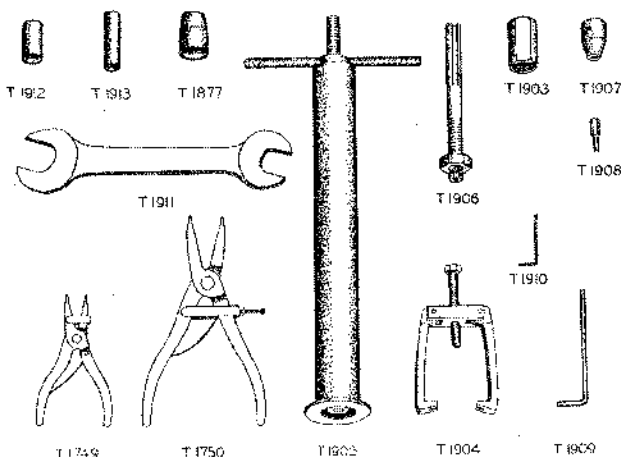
SPECIAL OVERHAUL TOOL KIT 16 H.P. ELGIN
